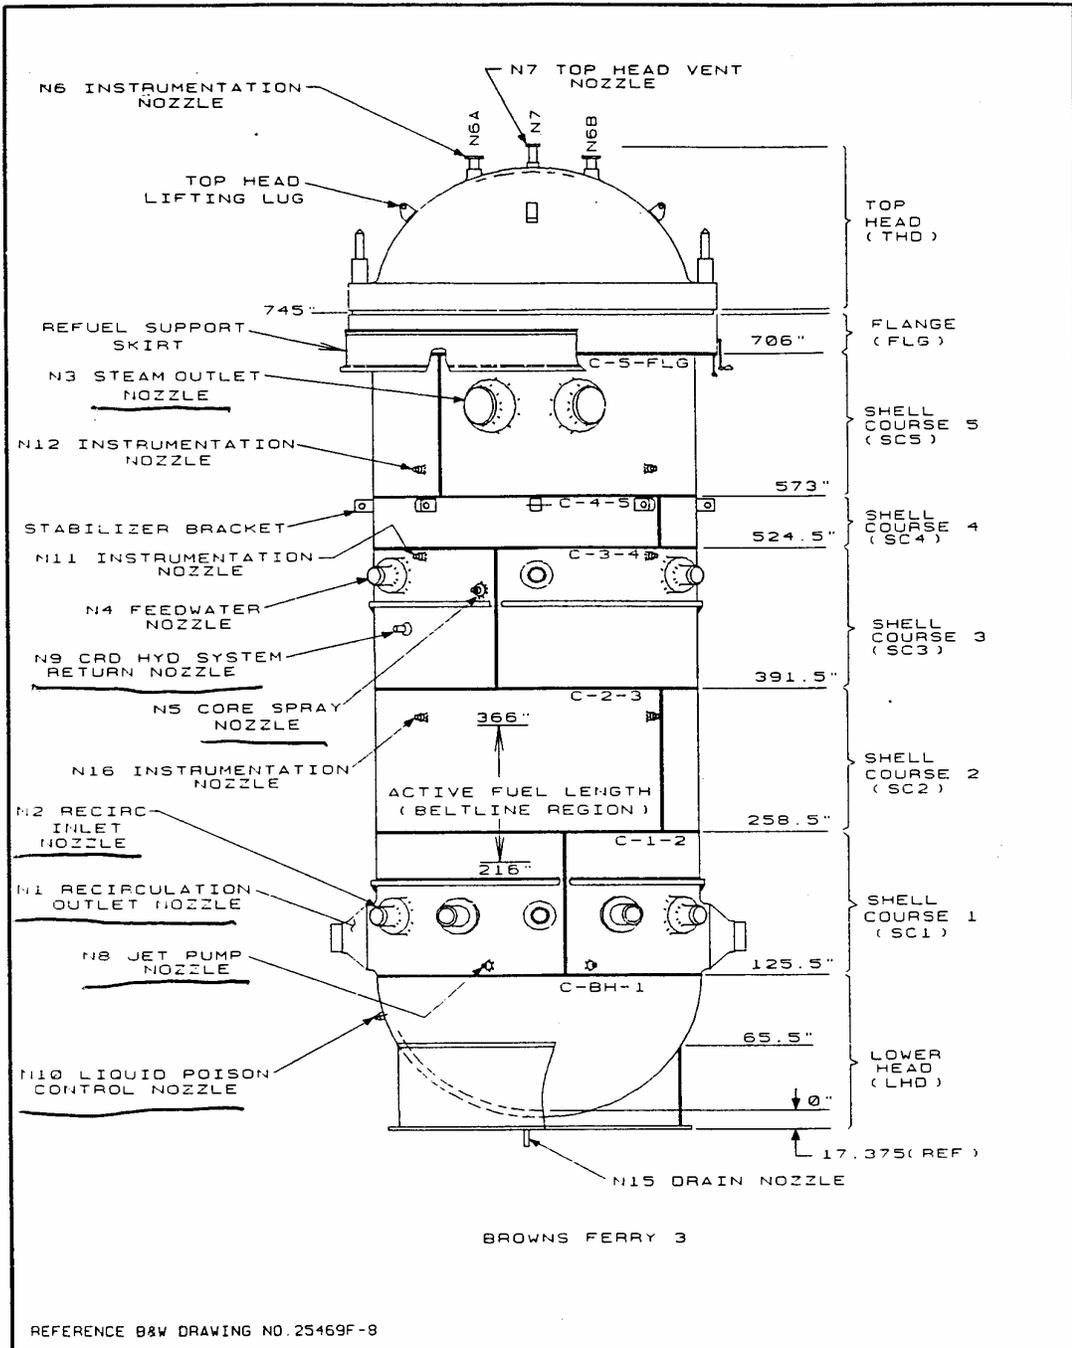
, N2, Recirculation Inlet Nozzles, N3, Main Steam Nozzles, and N5, Core Spray Nozzles
